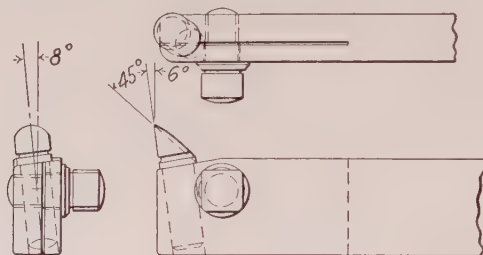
PLANER AND SHAPER TOOL FOR MACHINING ALUMINUM.
